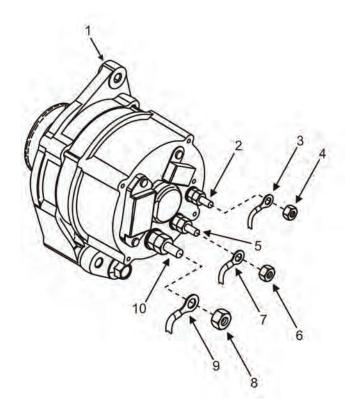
Battery-Charging Alternator Assembly — Wiring.
